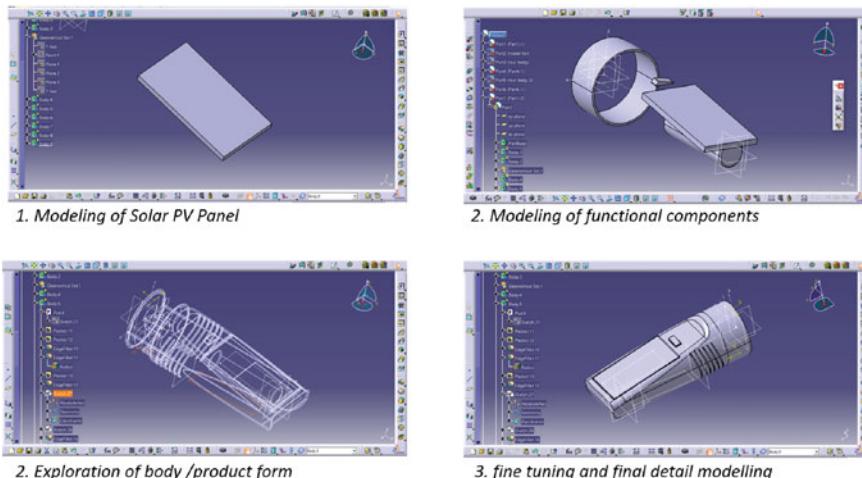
CAD Exploration steps of PIPV air blower design
